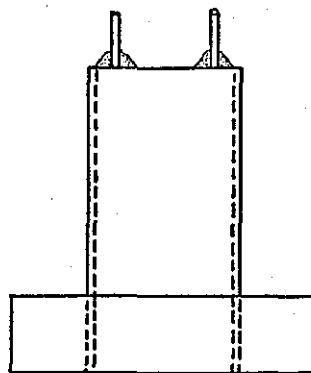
A Thin Film Surface Thermocouple used for Measurements on Cylinder Head
